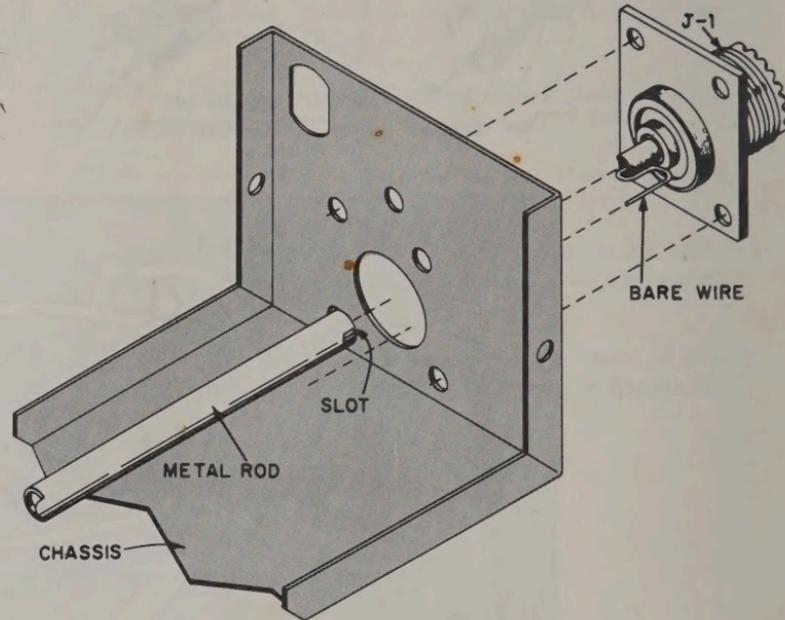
COAXIAL CONNECTOR MOUNTING
